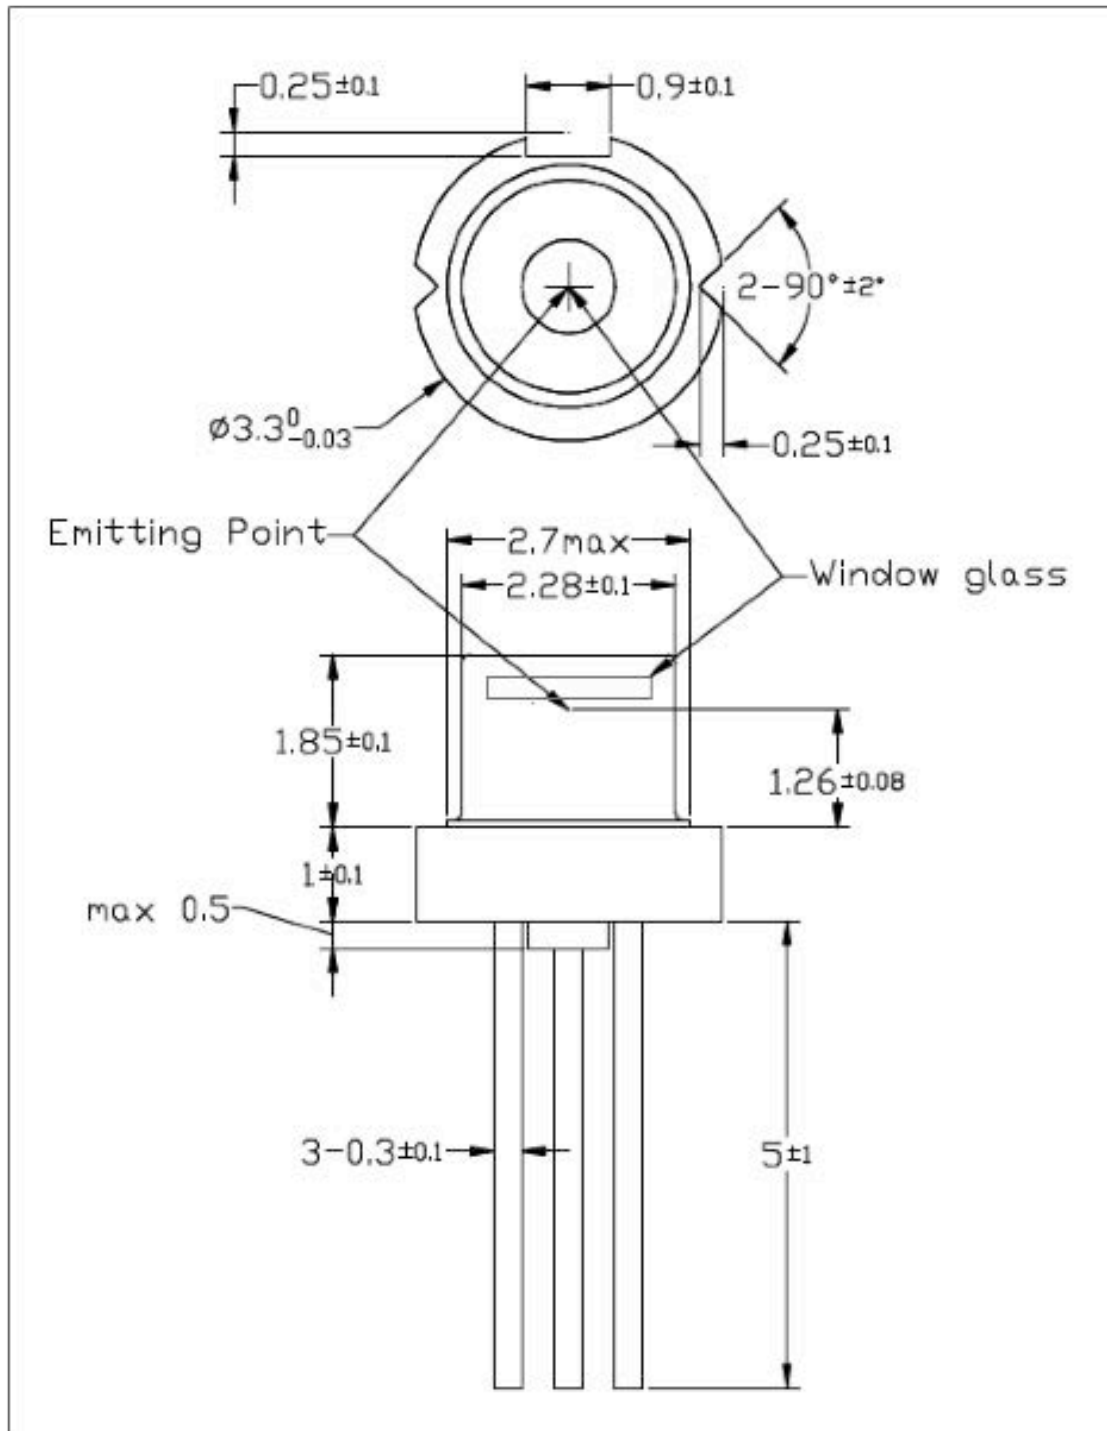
Laser Diode Dimensional Drawing [Appendix E-4]
